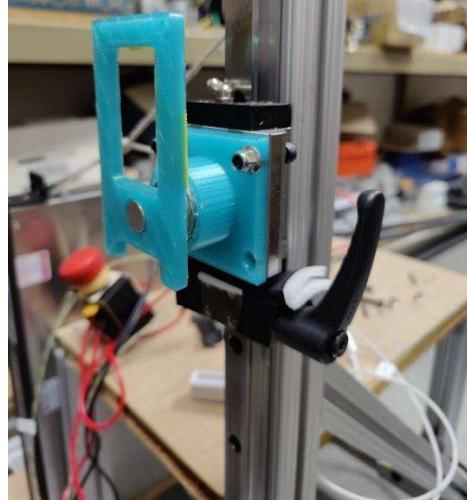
Initial test stand mount design with 3D printed bearing housing.
